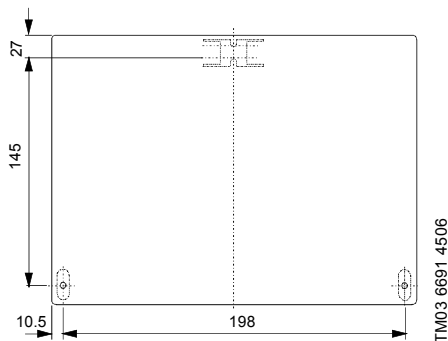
Wall-mounted enclosure Conex® DIA-2
